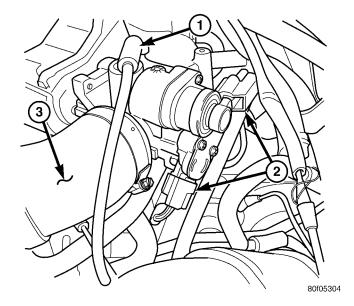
THROTTLE BODY CONNECTIONS - 2.4L TURBO
